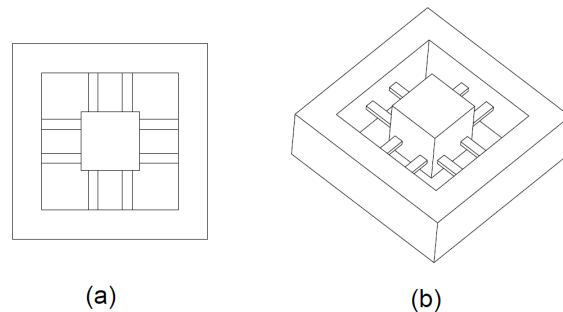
CAD of OctaBeams mechanical structure: (a) front view (b) isometric view.
